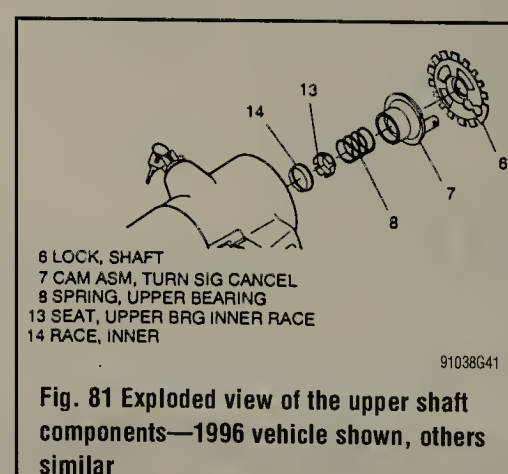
Exploded view of the upper shaft components—1996 vehicle shown, others similar
